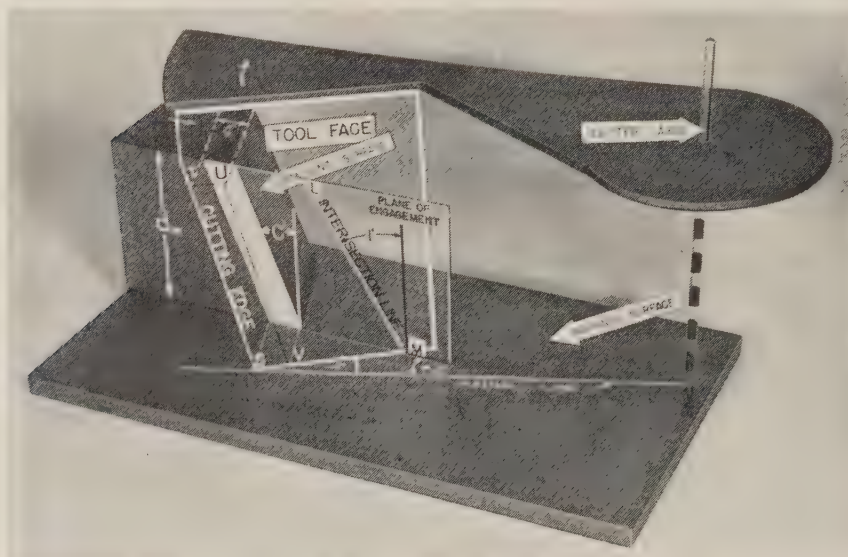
MODEL OF CUTTER AND WORK ILLUSTRATING INTERSECTION LINE OF TOOL FACE AND PLANE OF ENGAGEMENT
